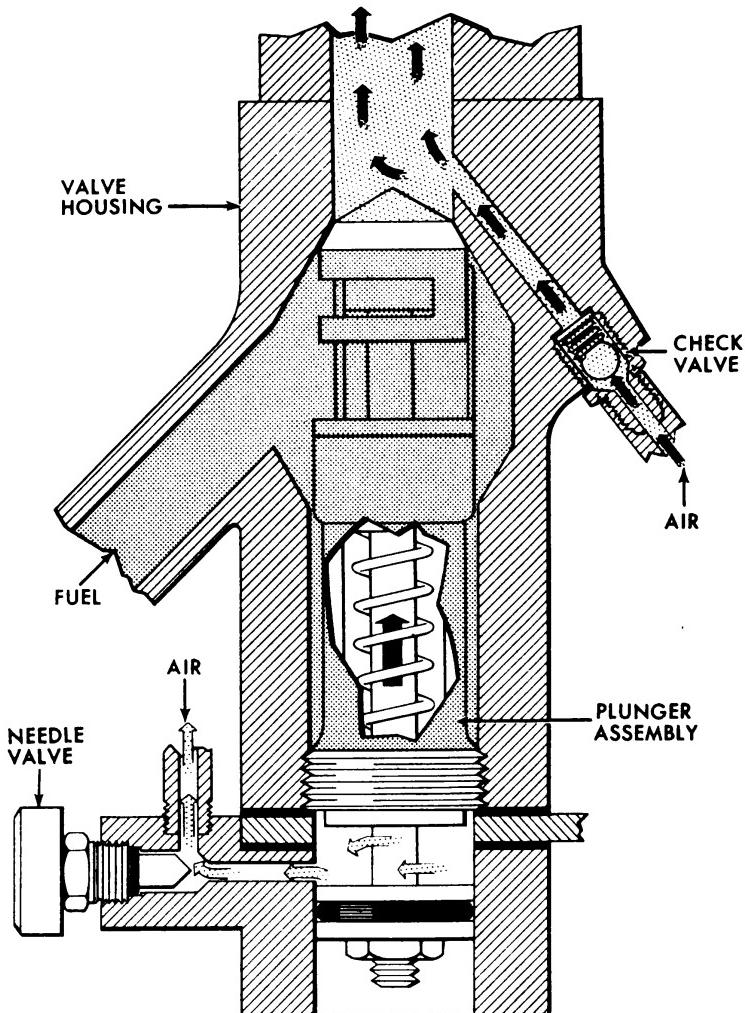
Operation of discharge valve when blow-out lever is depressed.
